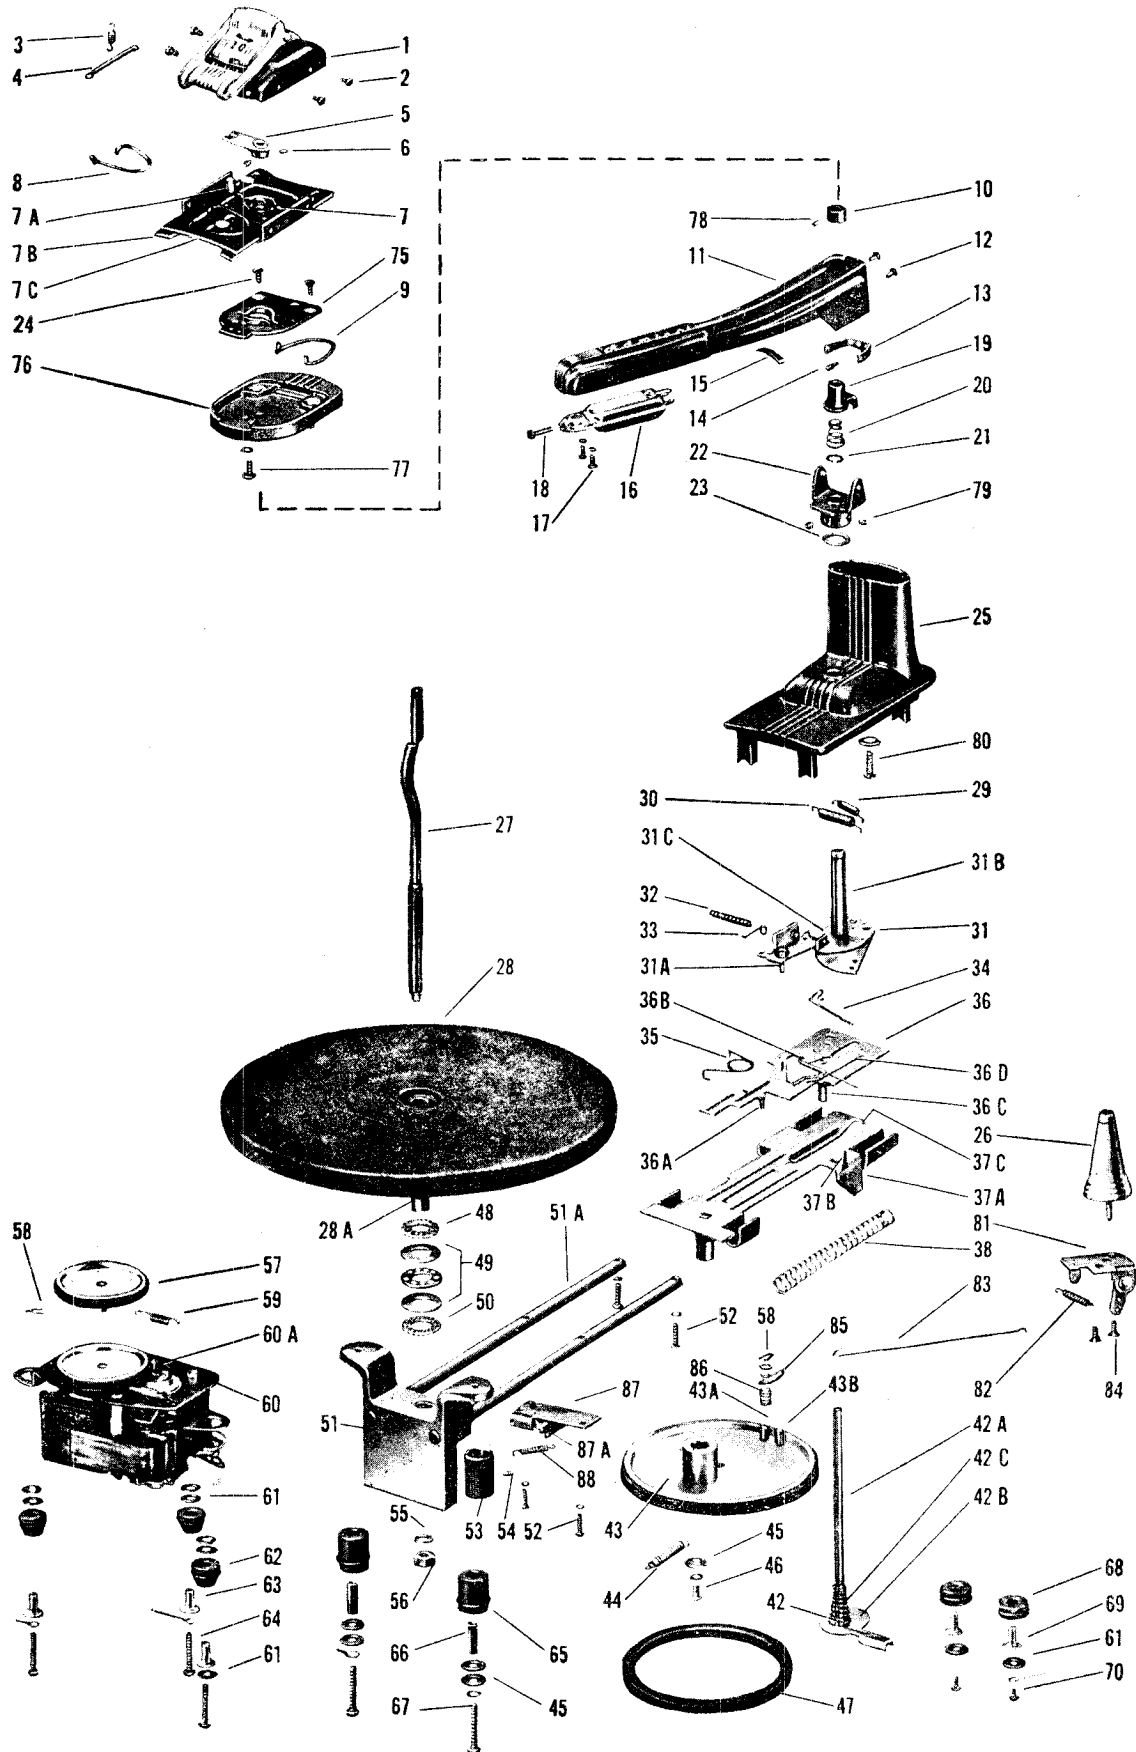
RECORD CHANGER, EXPLODED VIEW
